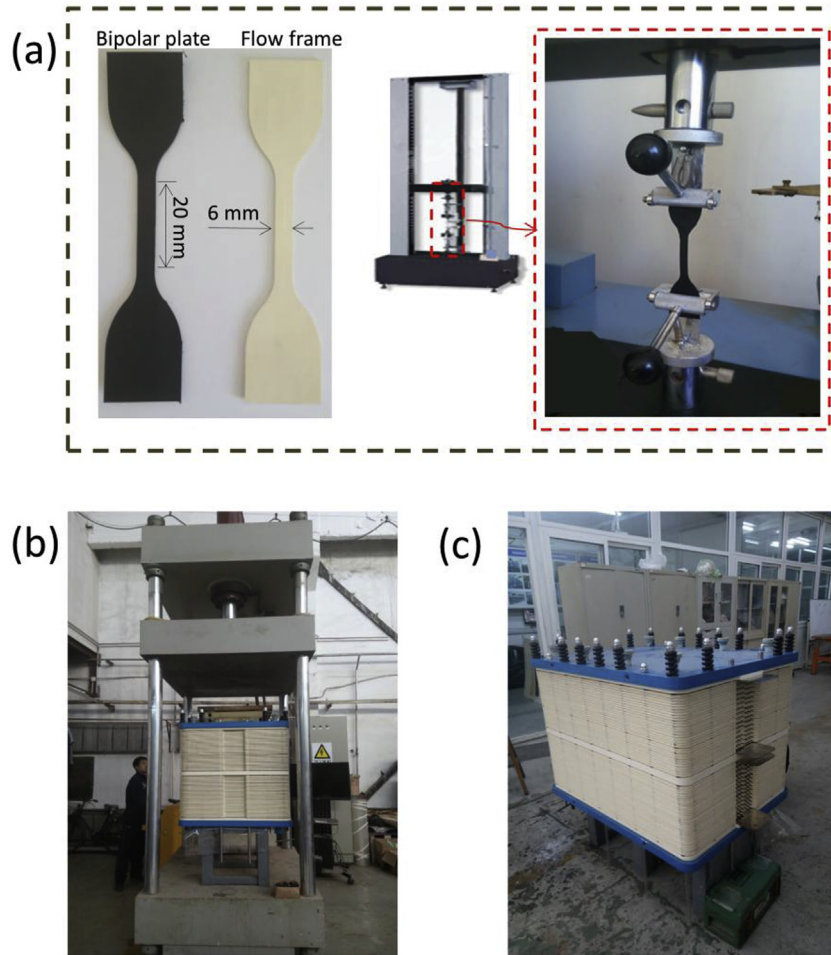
Illustrations of tensile test and stack assembly. (a) Tensile tests of the flow frame and the bipolar plate; (b) Stack assembly process; (c) An assembled stack.
